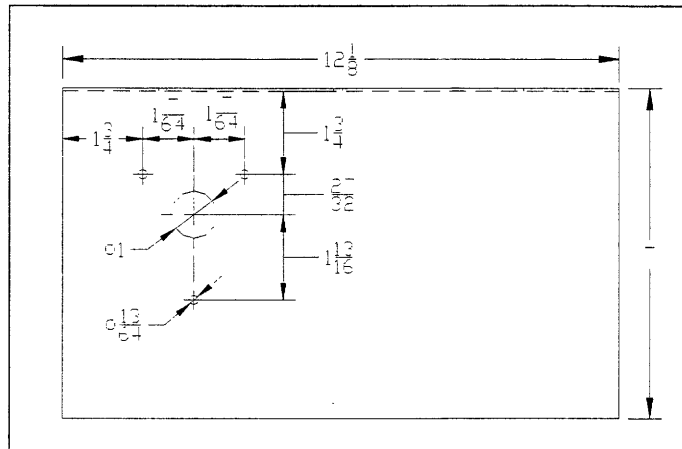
Part Drawing - Top View of Mechanical Arm
